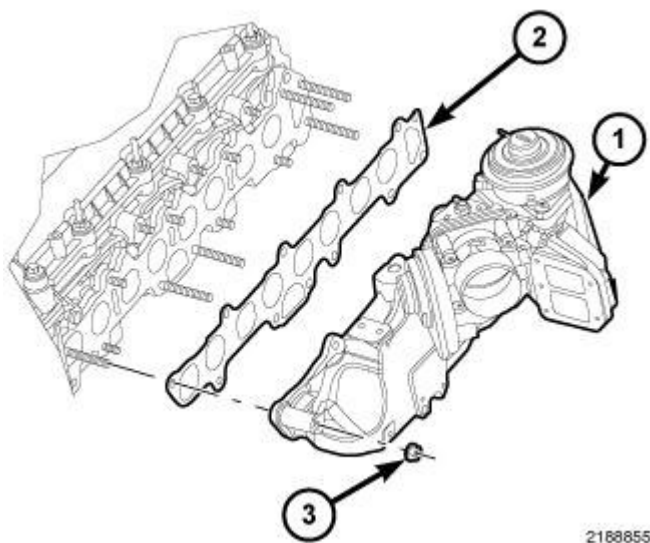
Identifying Manifold Retaining Nuts, Intake Manifold & Intake Manifold Gasket
